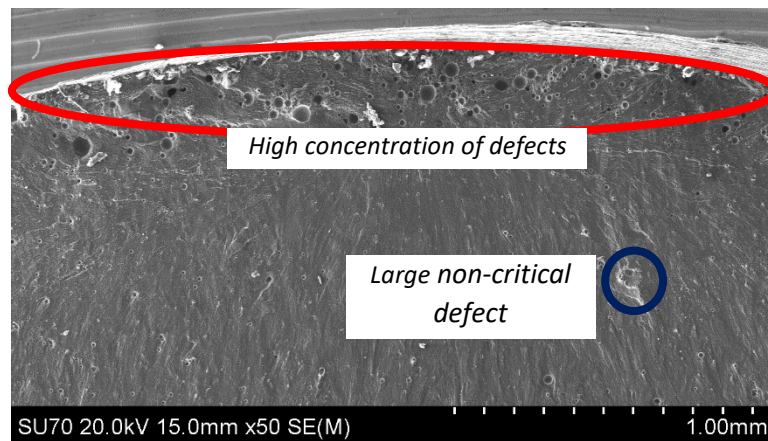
Example of a fracture surface showing a large concentration of defects close to the surface and one non-critical internal defect.
